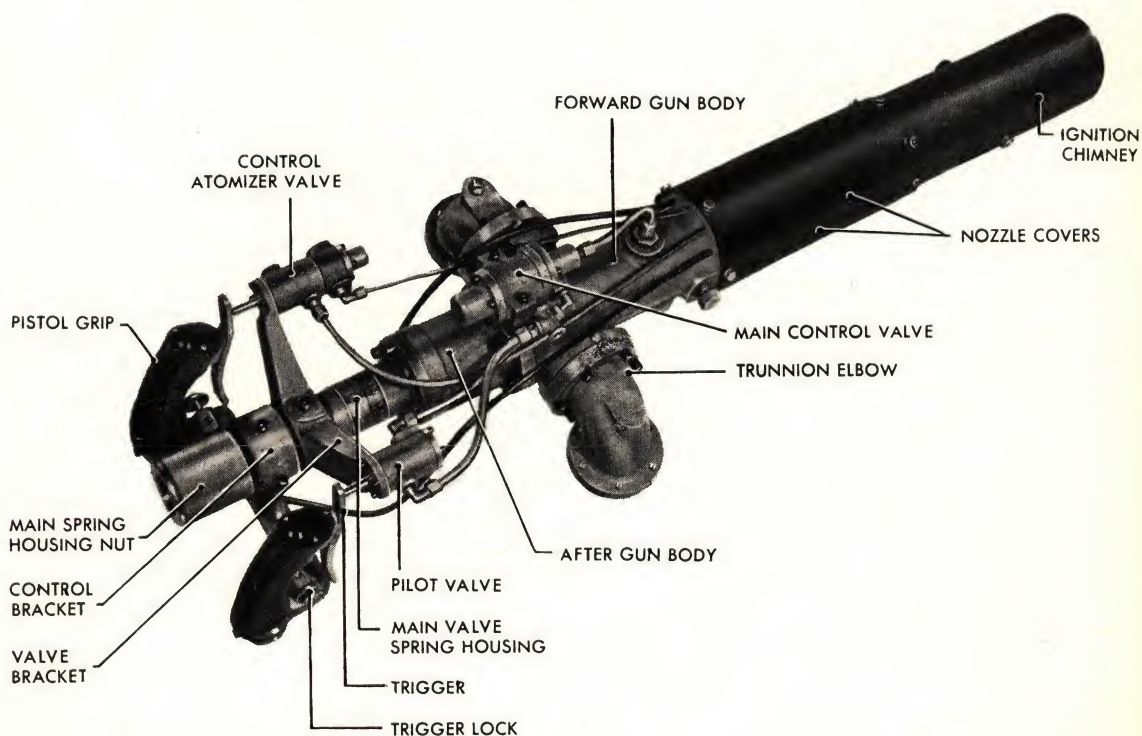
Flame Thrower Mk 1—Gun With Subassemblies
